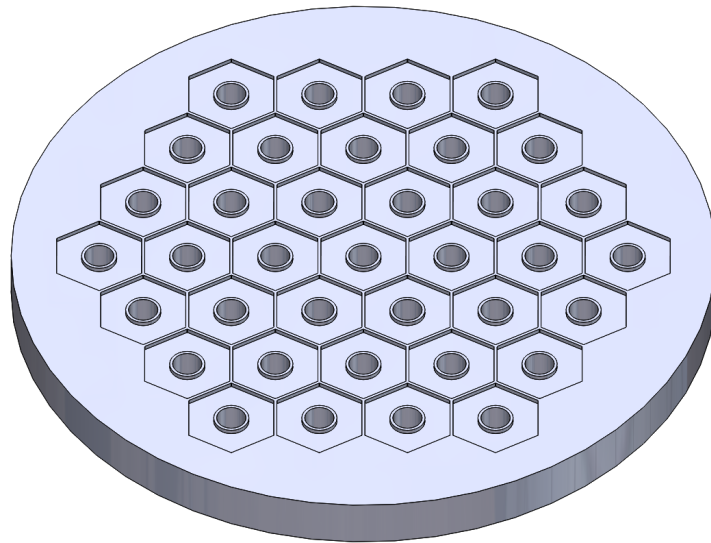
MIMO - Straight Pipe Panel - CAD - Horizontal Cross-Section View
